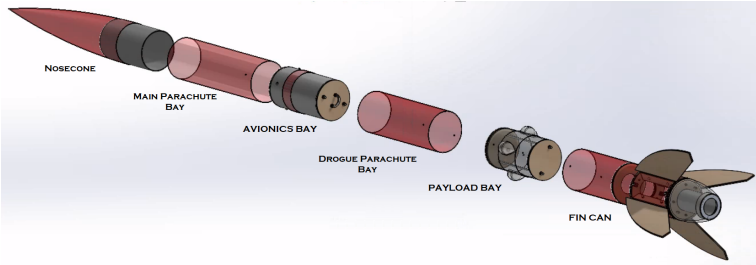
Exploded view CAD of the entire assembled launch vehicle.
